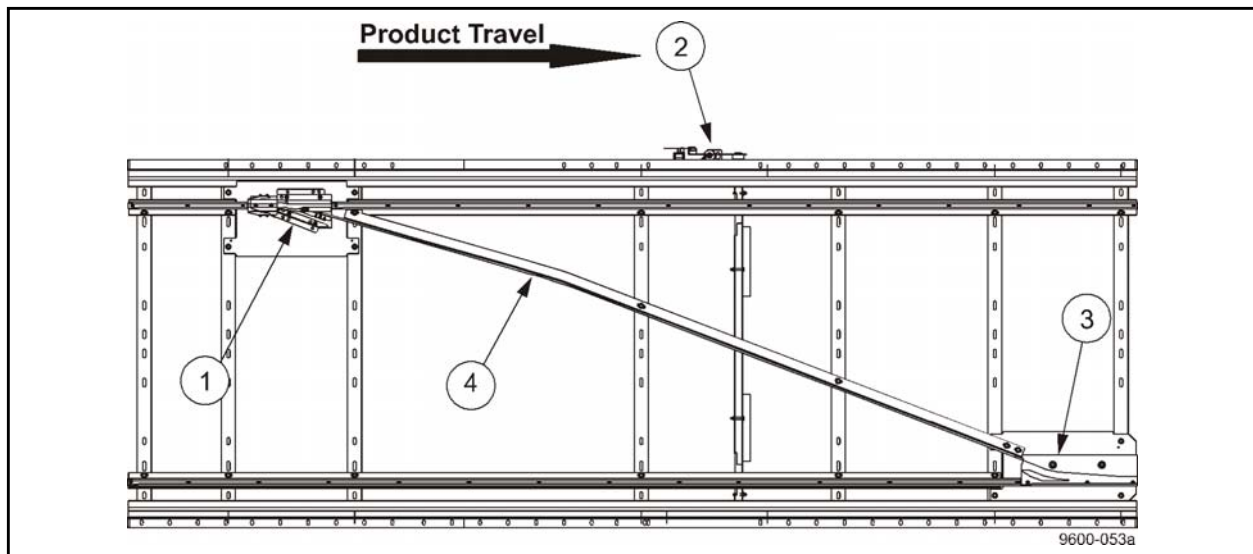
9 Intermediate Section - 16° / 21° RH Divert - Drawings
